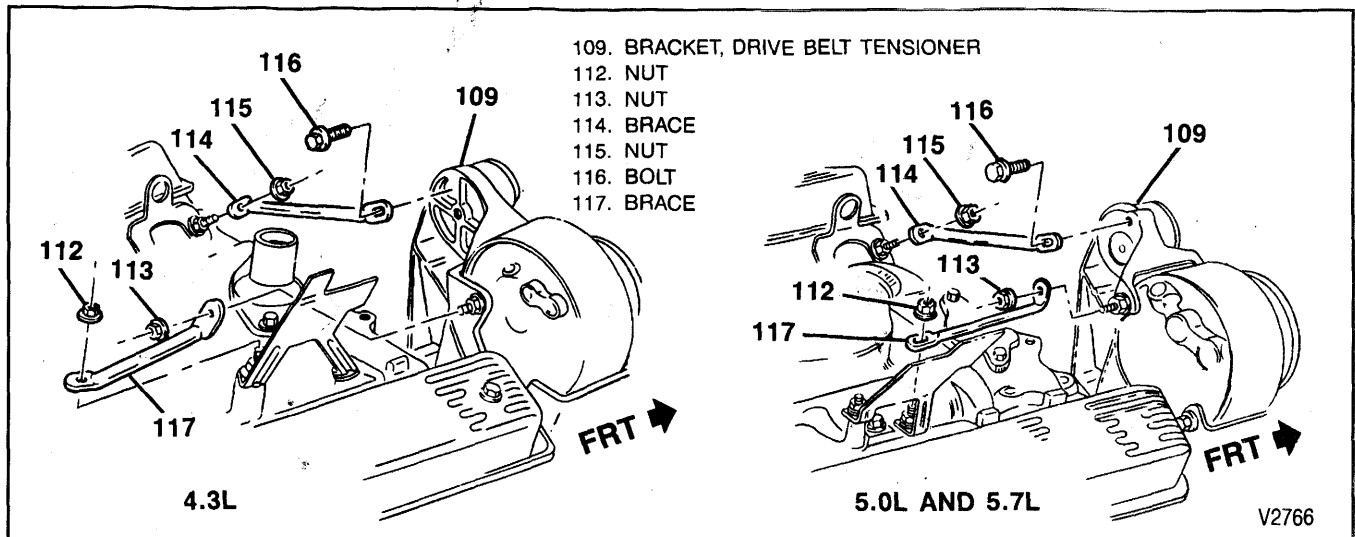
Belt Tensioner Braces (4.3L, 5.0L, and 5.7L Engines with Air Conditioning)
